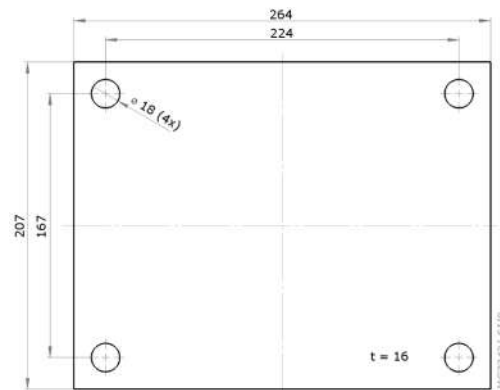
Steel plinth - flange plate B: top view (dimensions in mm)
